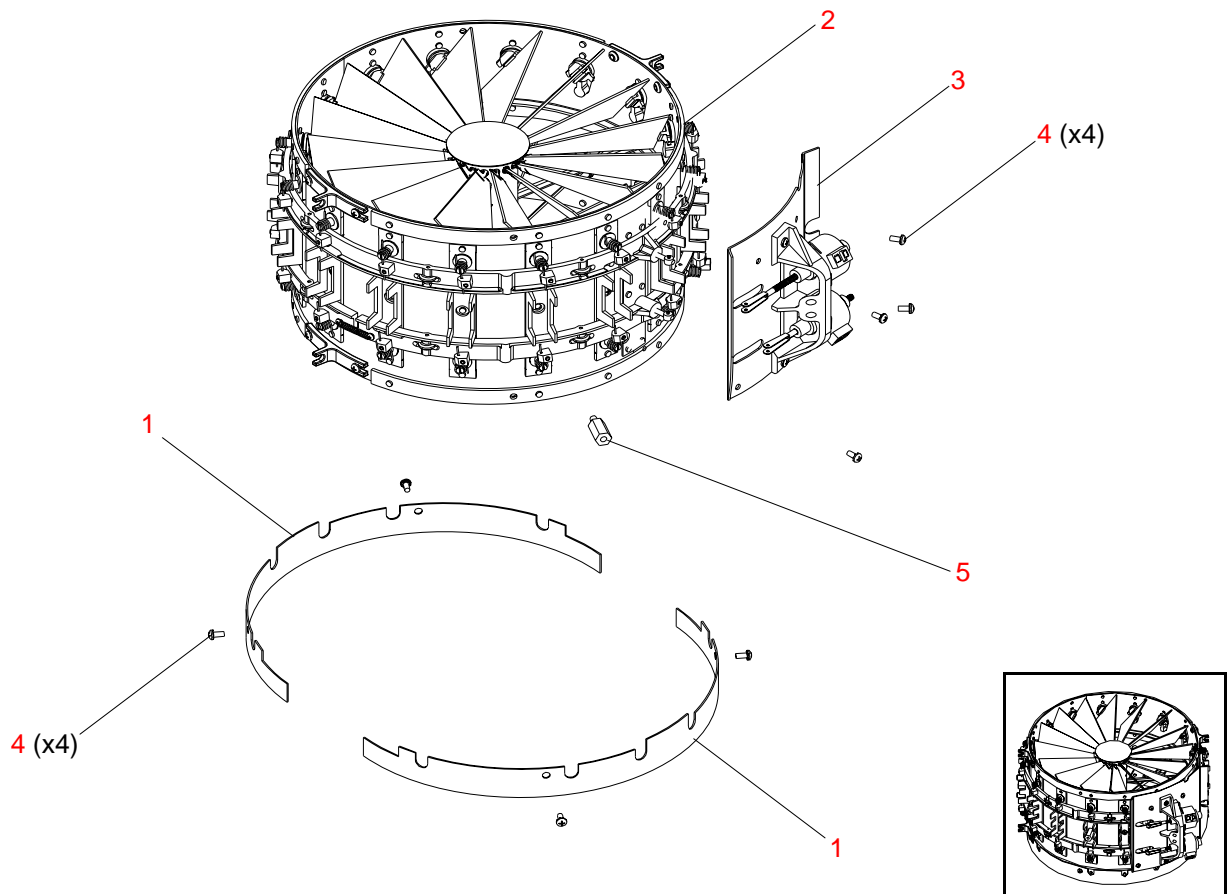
VL500 Heatsink Assembly (VL500 80V)
